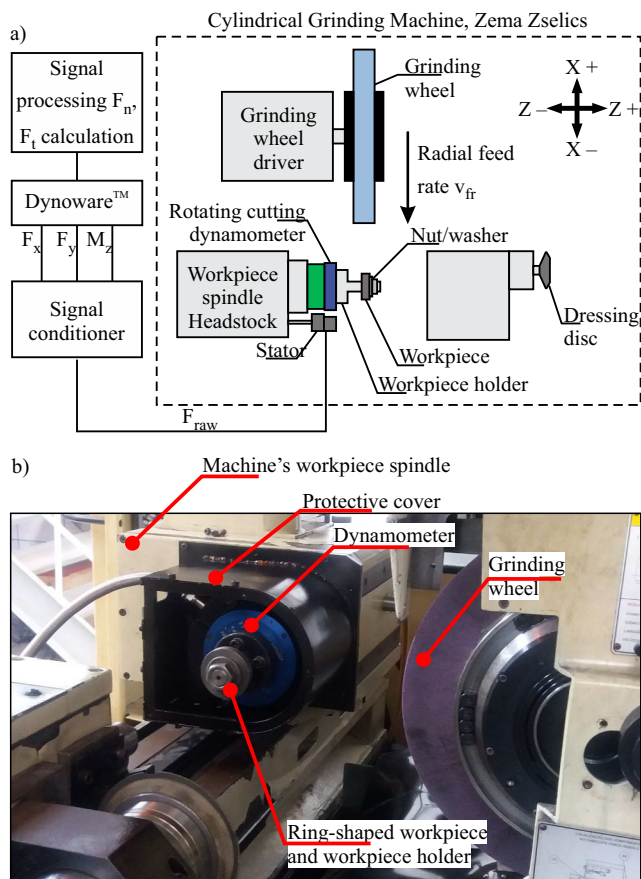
Experimental setup for the experiments: a schematic illustration and b detailed view of the grinding machine and grinding force measuring system
